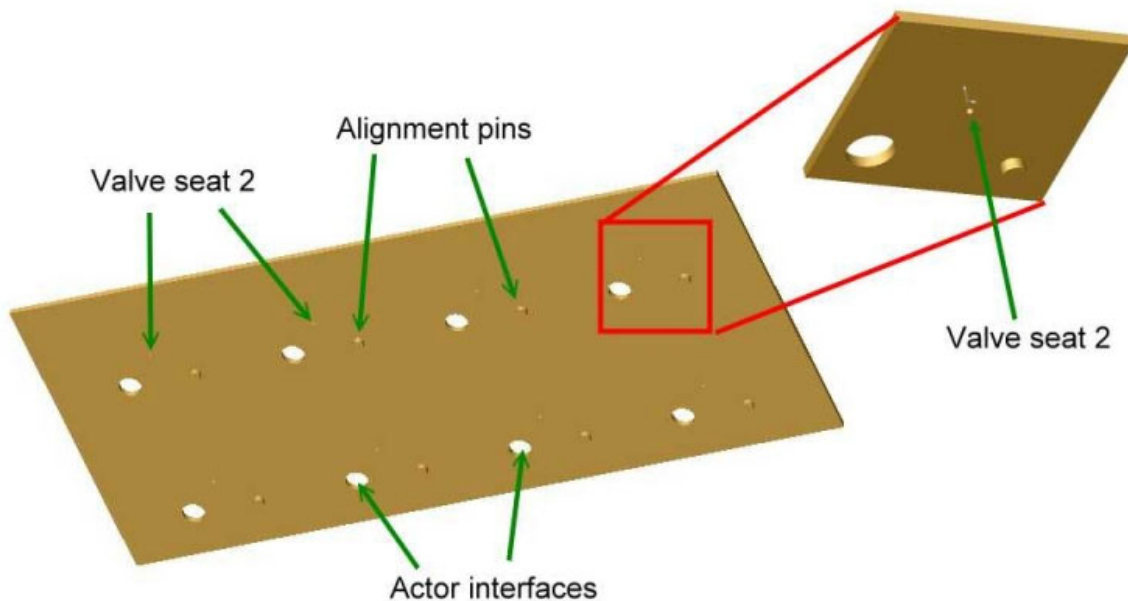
The construction of the top layer. It was 0.50 mm thick and contained valve seats with a diameter of 300 μm , alignment pins and actuator interfaces with a diameter of 2 mm.
